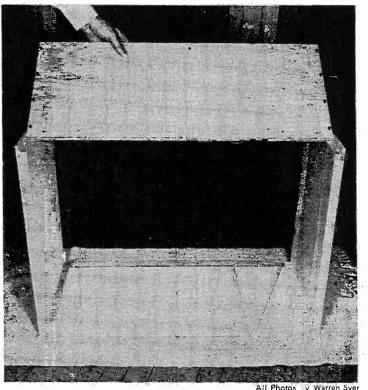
Bottom panel fits into rabbets. Note that this enclosure is assembled upside down; rug avoids gouges on top.
